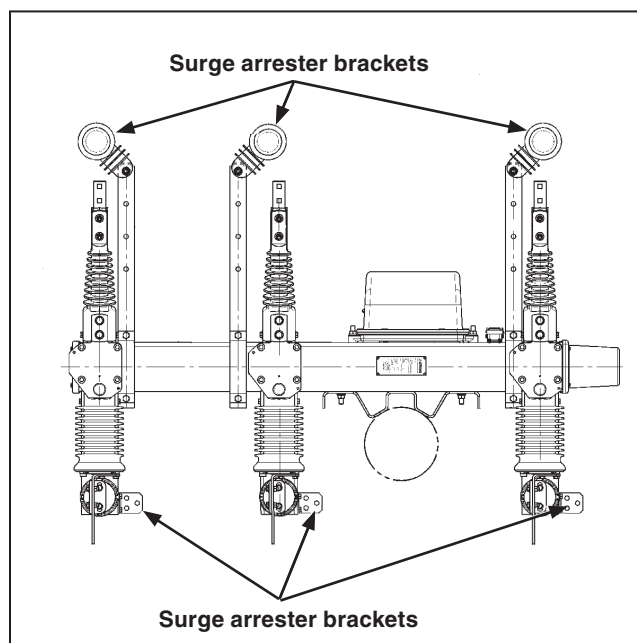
A typical surge arrester mounting arrangement. (Optional disconnect and front brackets shown.)
